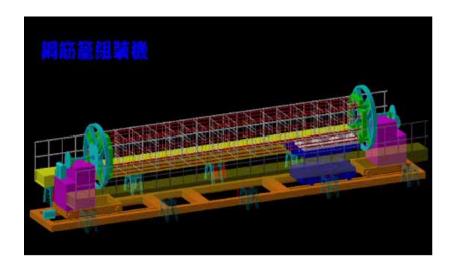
Machine for Rebar Cage Assembly step2: rotating wheels where longitudinal rebar are fixed temporarily makes tying rebar easier.
